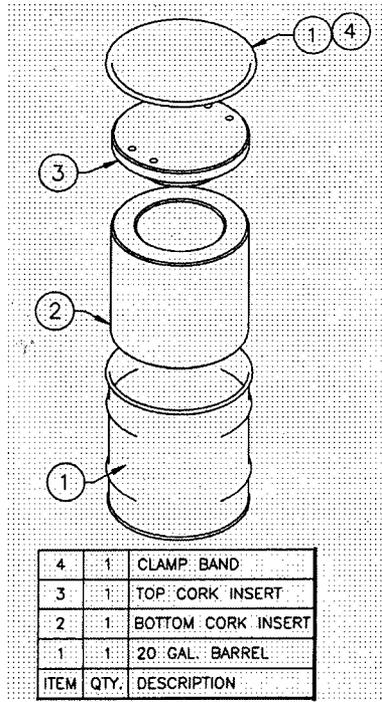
Exploded View of Model 976A Drum and Basic Inserts
